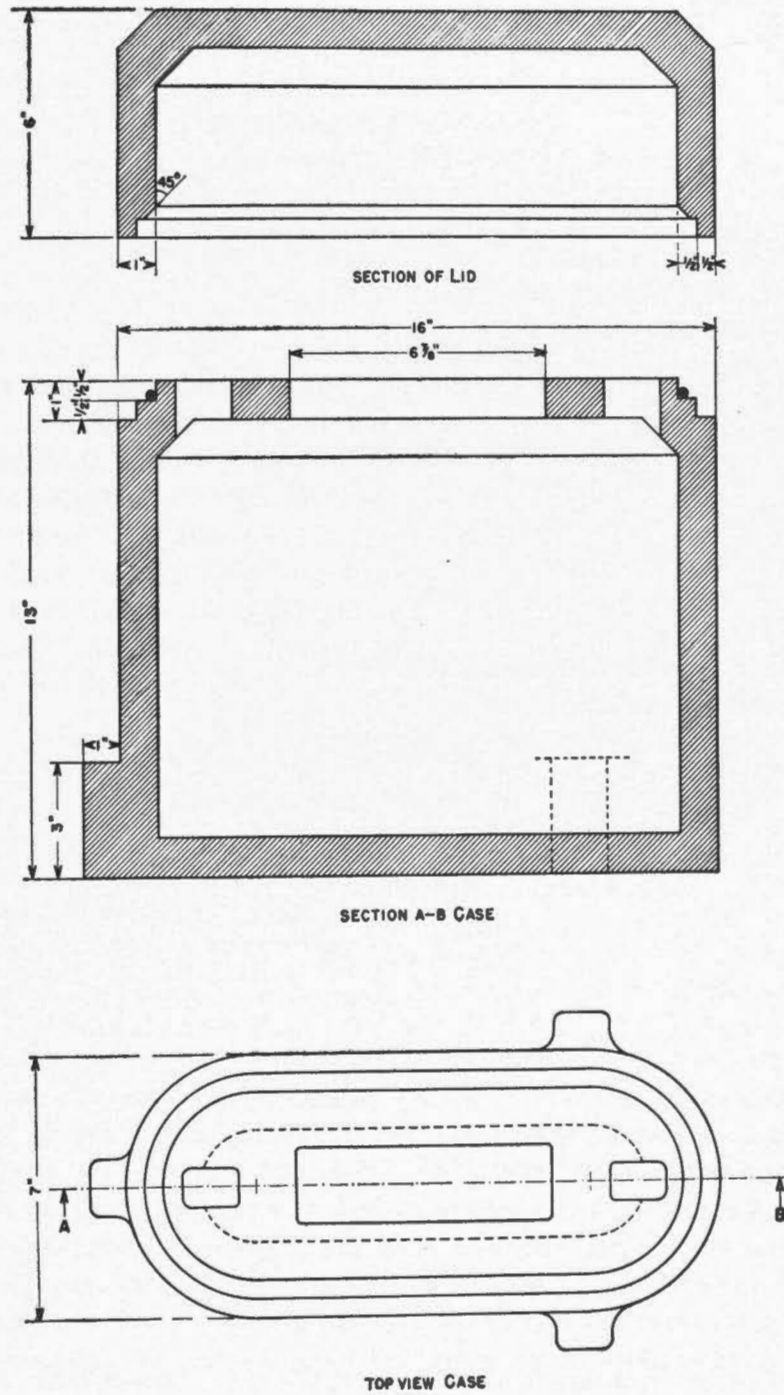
Sectional view of the pendulum case casting, showing dimensions.
